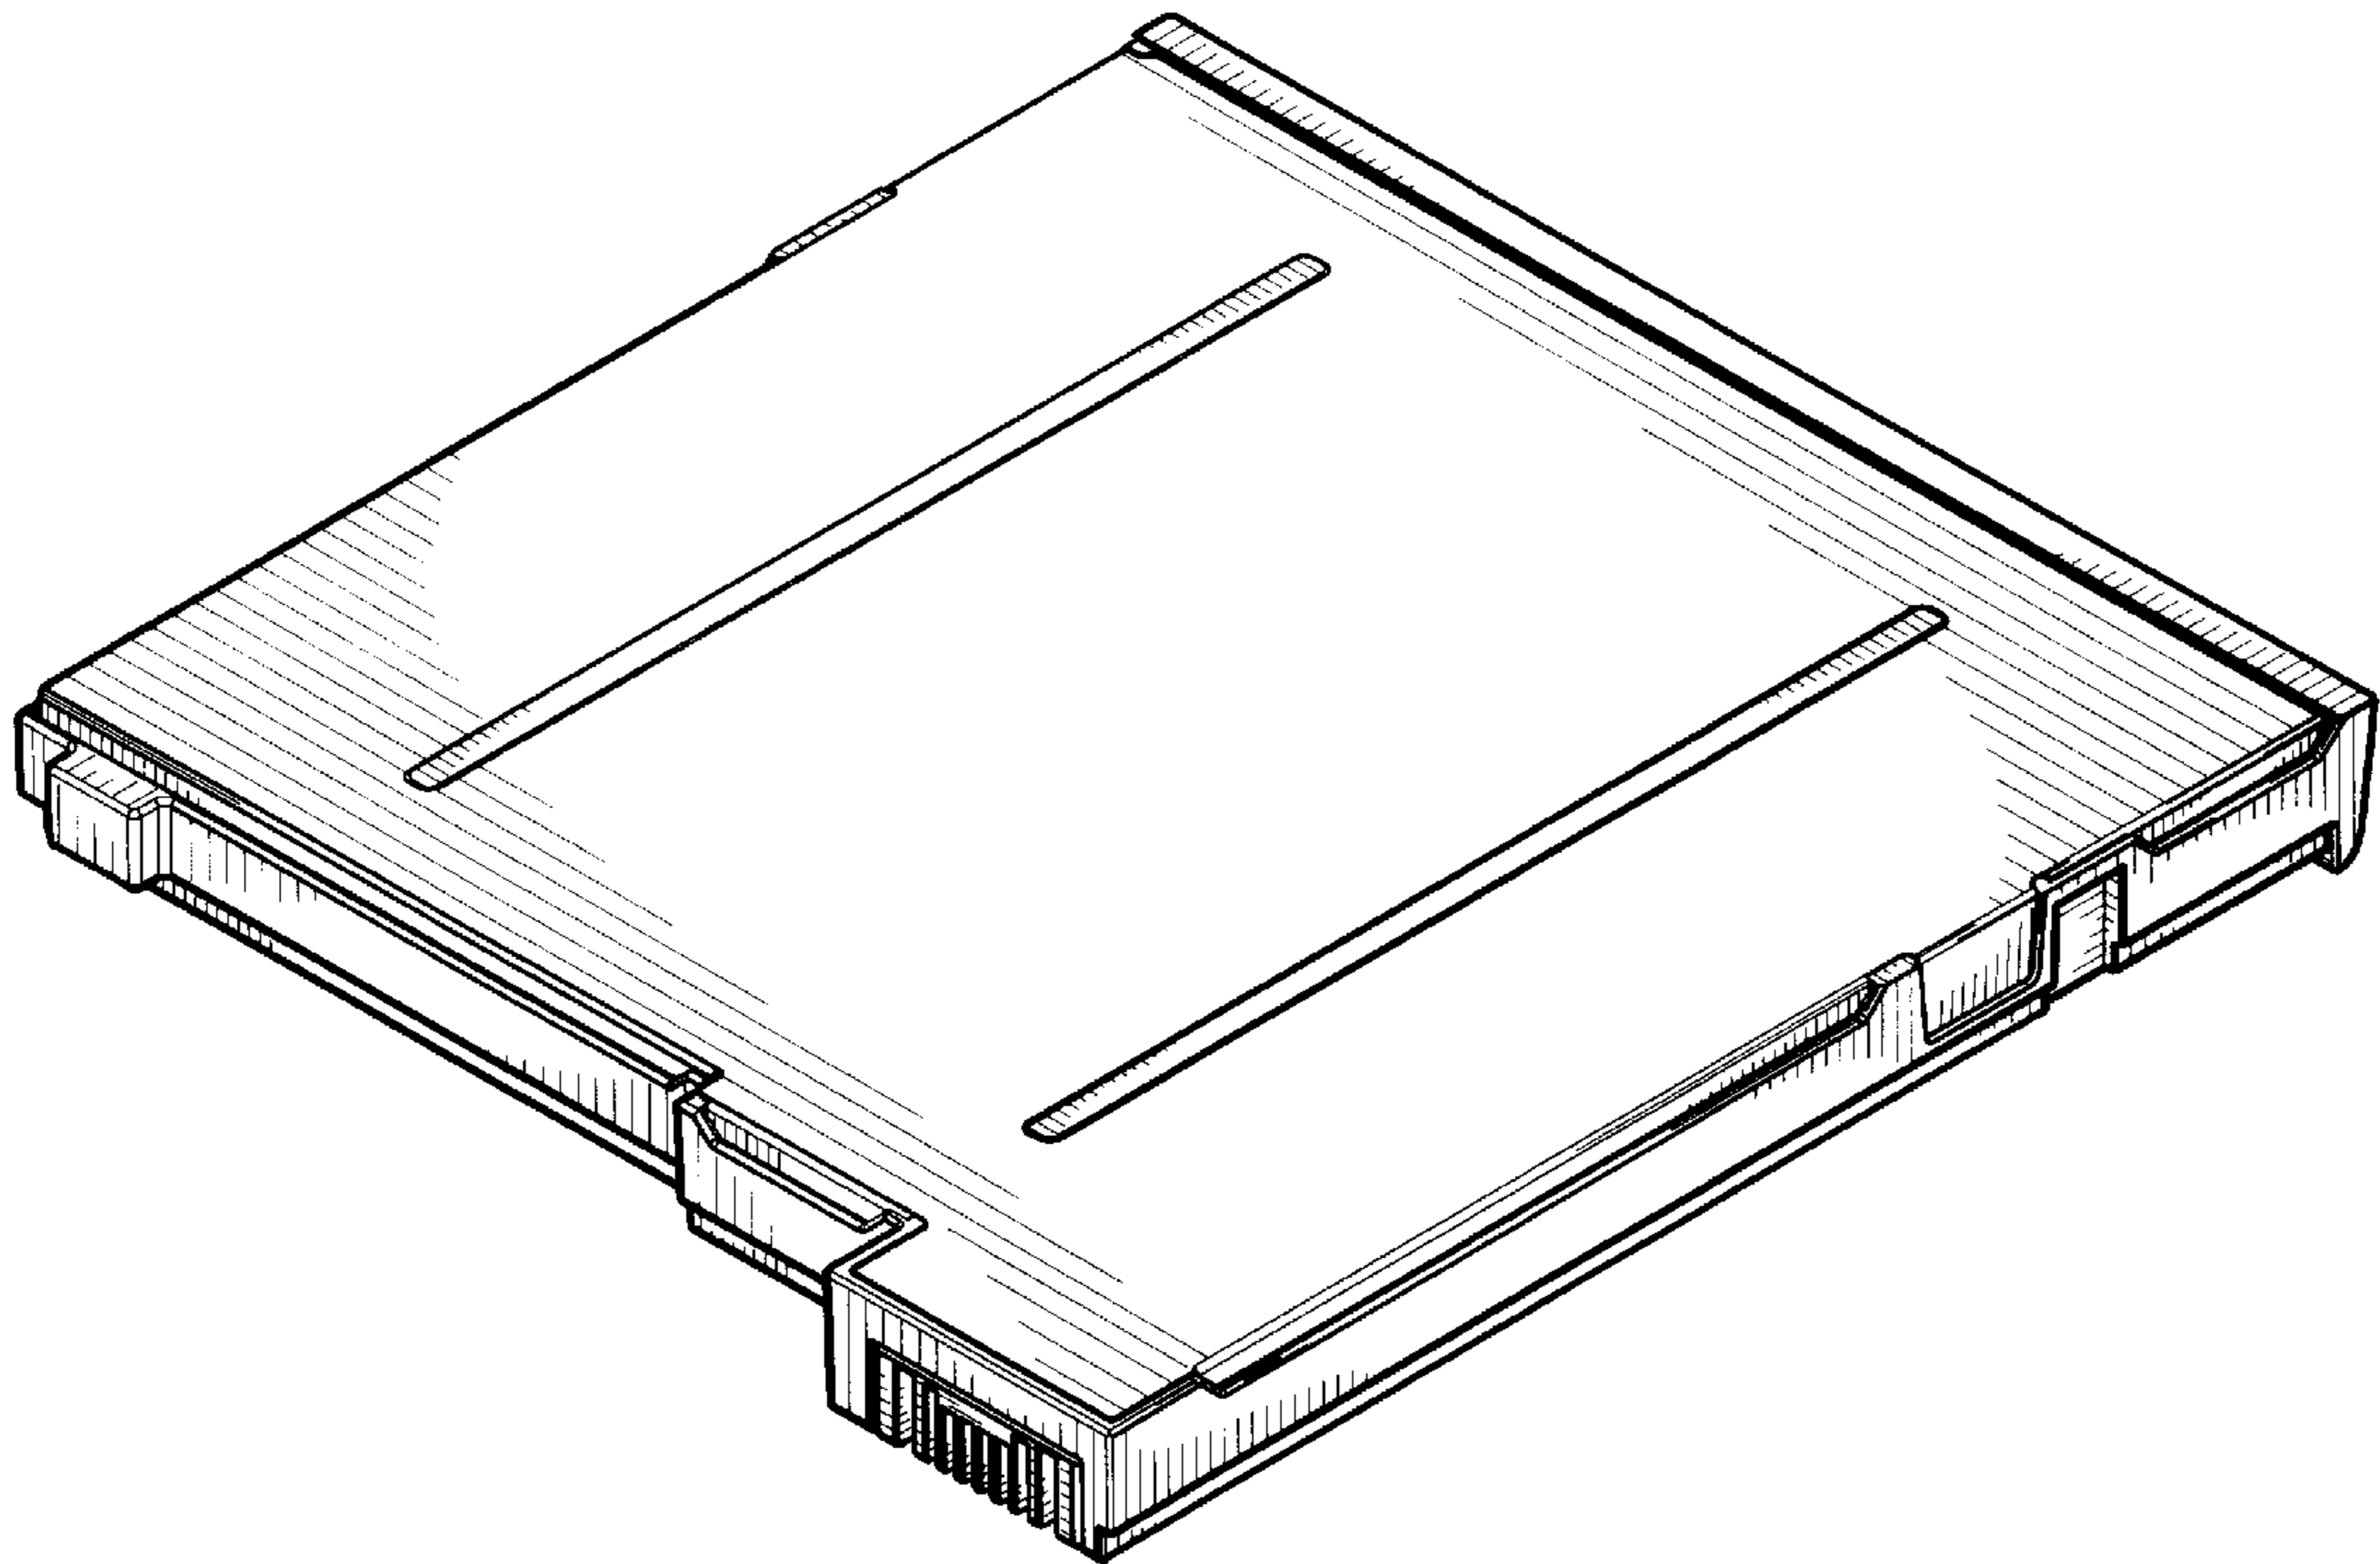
is a rear, top, right isometric view of a battery housing showing our new design;
